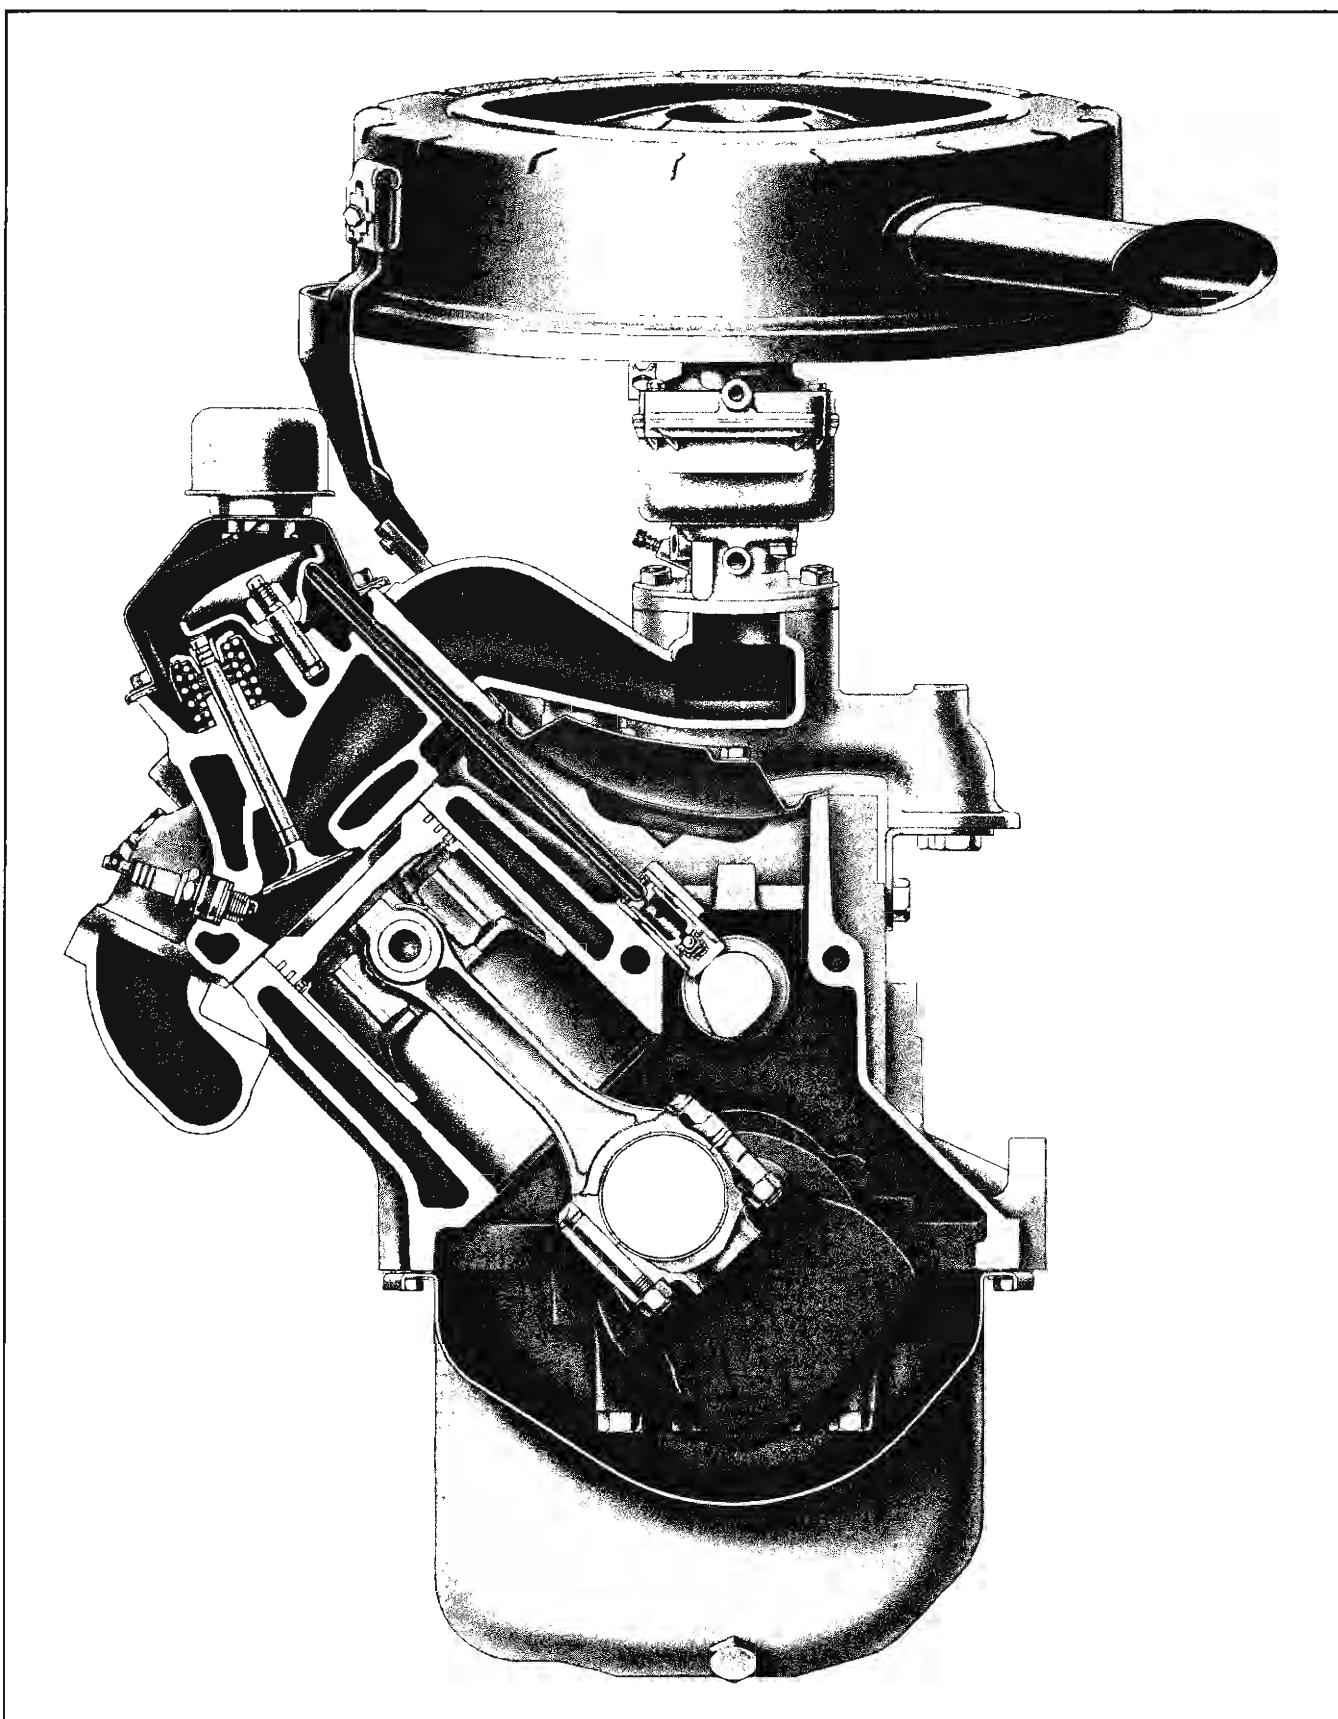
Transverse Cross Section of Tempest 4 Engine
